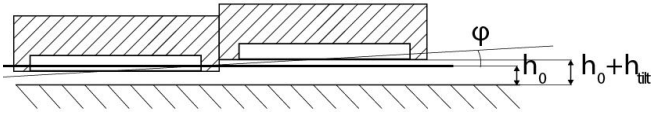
A simplified model of bearing tilt of a multi-recess bearing. The original film height of the bearing without tilt would be h_0 , but due to tilt a difference of h_{tilt} is introduced.
